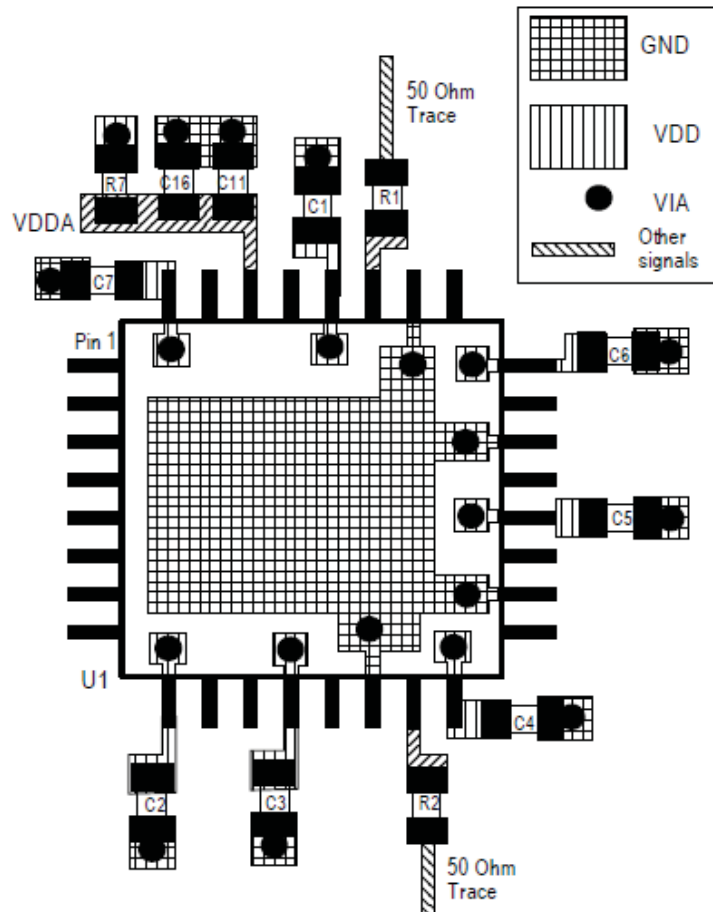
B. PCB BOARD LAYOUT FOR 8705I
